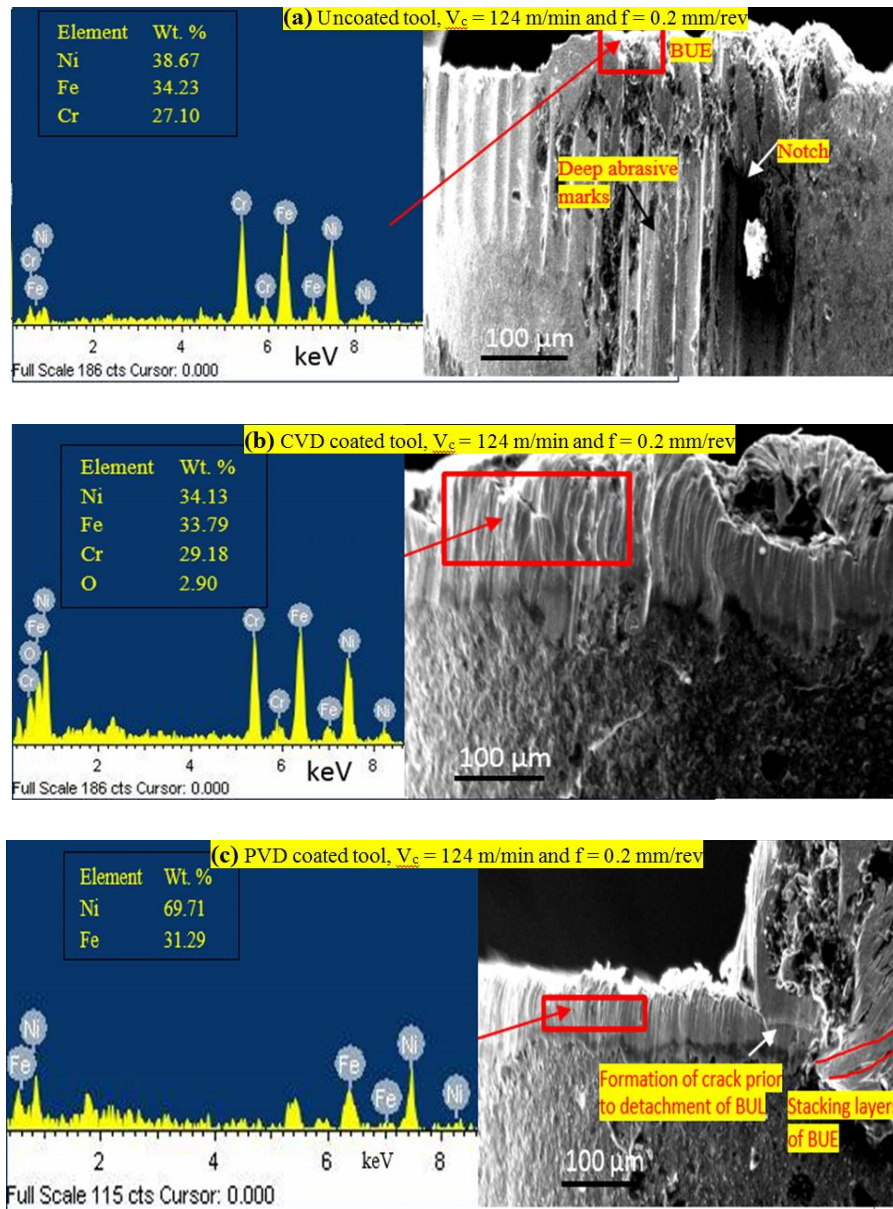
SEM images and corresponding EDS analysis of flank surface of (a) uncoated tool after 90 s of machining, (b) CVD and (c) PVD coated tools, after 300 s of machining at cutting speed of 124 m/min and feed of 0.2 mm/rev.
